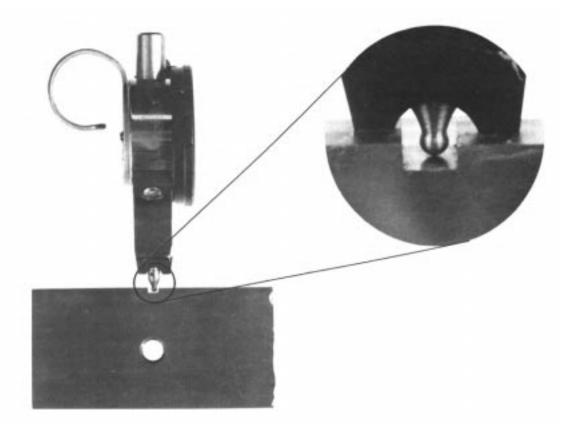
Step-Type External/Internal Buttress Thread Height Gauge for 16-in., 18<sup>5</sup>/<sub>8</sub>-in., and 20-in. Diameter Pipe and Couplings and All Extreme-Line Casing Threads
